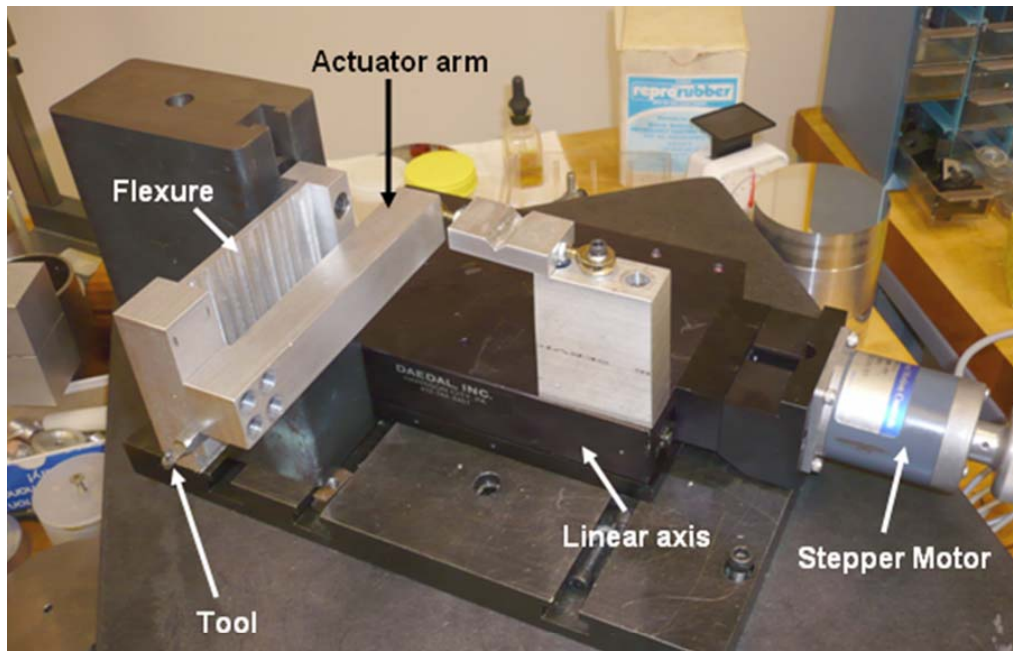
Tool rotation apparatus showing the flexure, linear axis and stepper motor.
